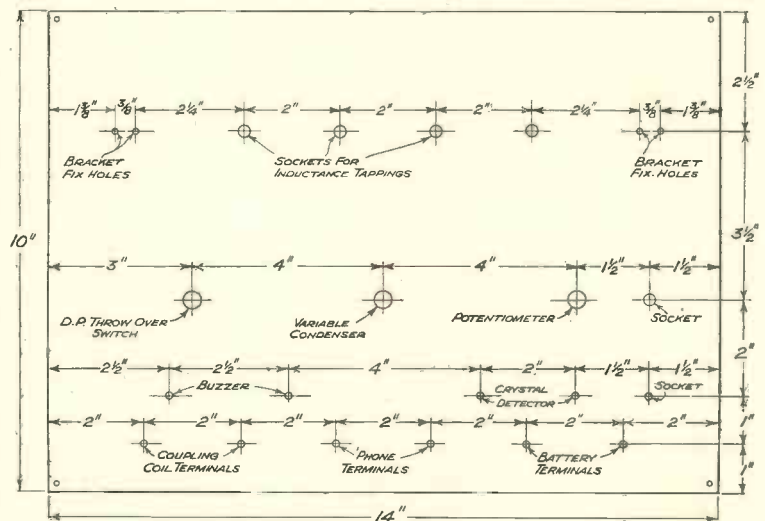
THE PANEL DRILLING DIAGRAM.
